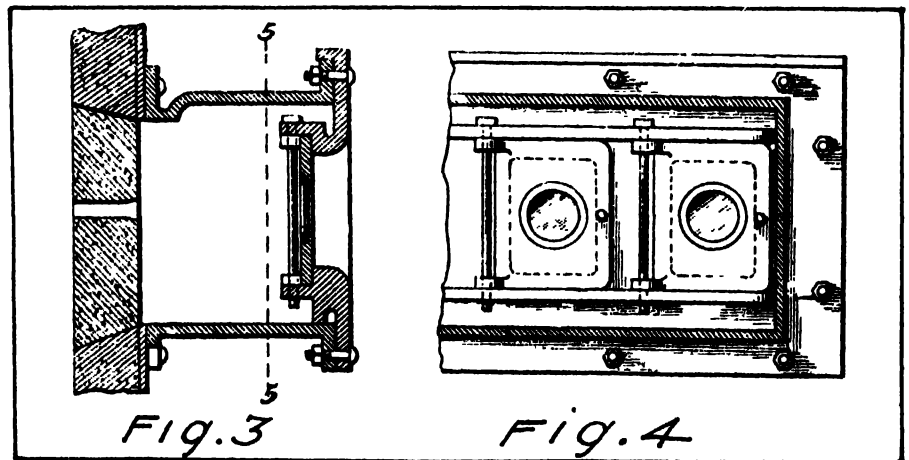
SECTION AND DETAIL OF WIND BOX FIG. 4—DETAILS OF DOORS SHOWING THE ARRANGEMENT OF PEEP HOLES
